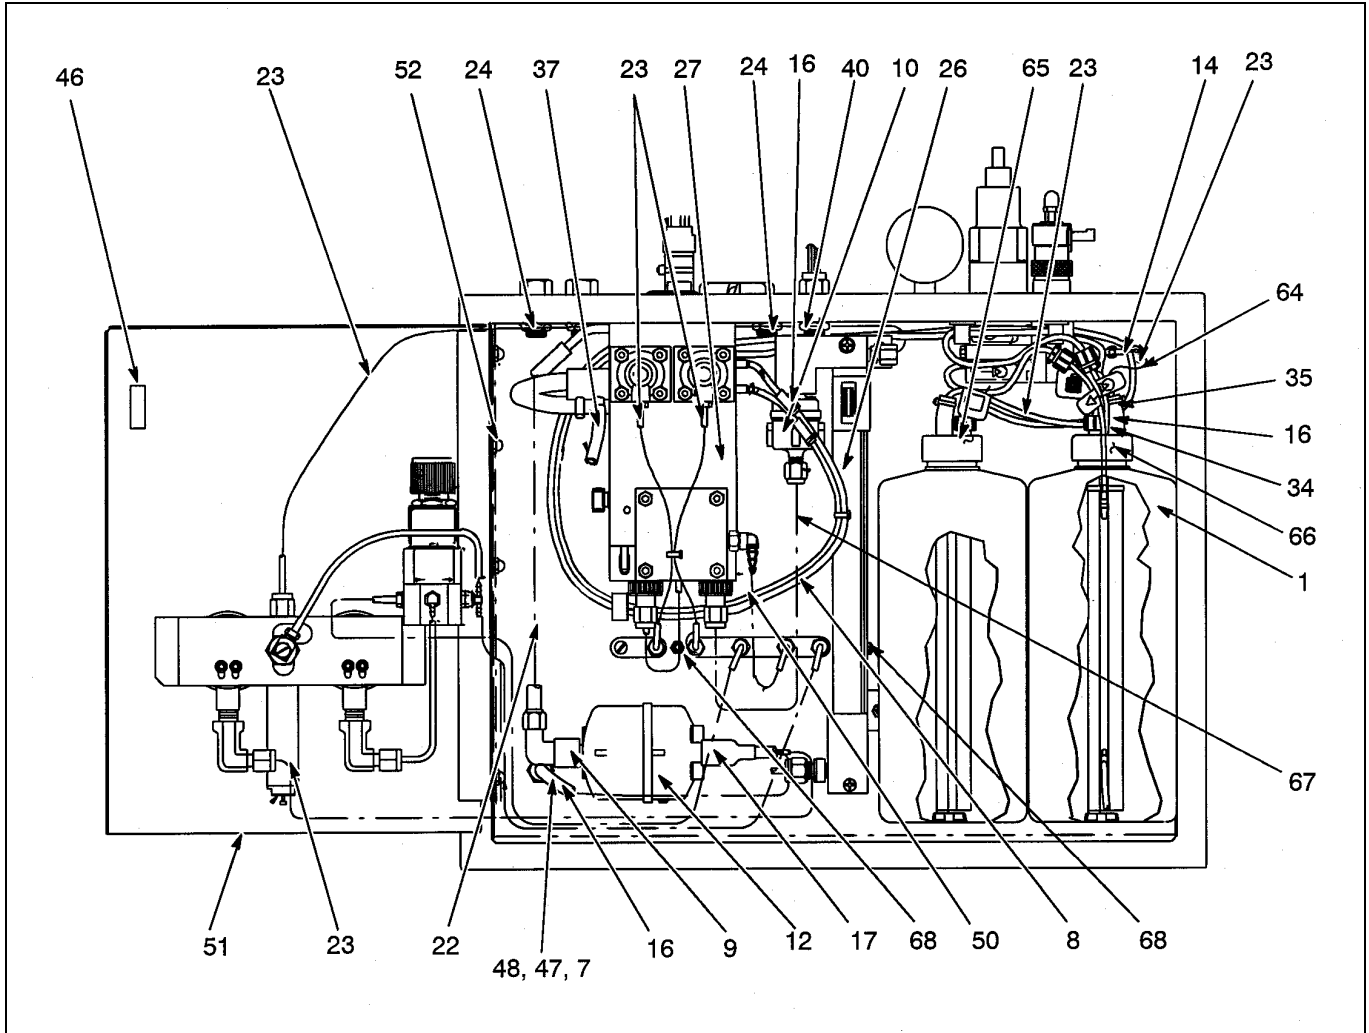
EXCEL[®] Hydraulic/Pneumatic Assembly, Sheet 1
